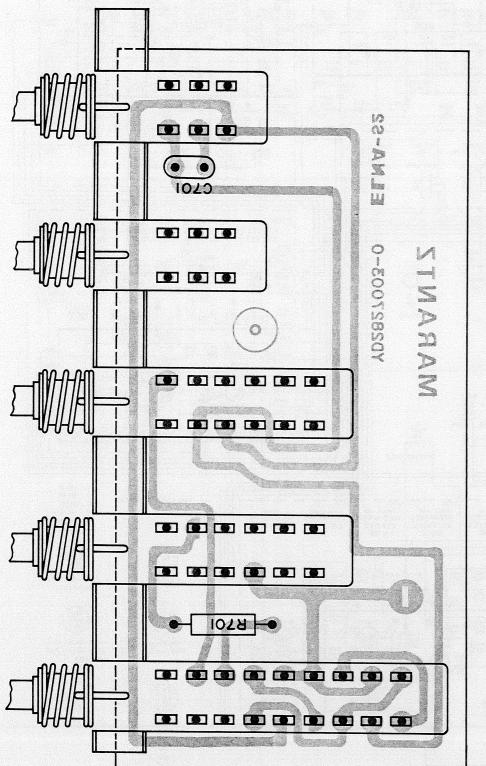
Mode Selection Switch Unit Assembly P700 Component Locations
